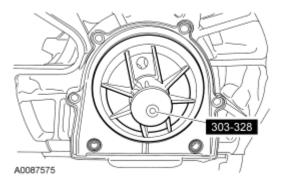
Positioning Crankshaft Rear Oil Seal Using Special Tool (303-328) Courtesy of FORD MOTOR CO.
